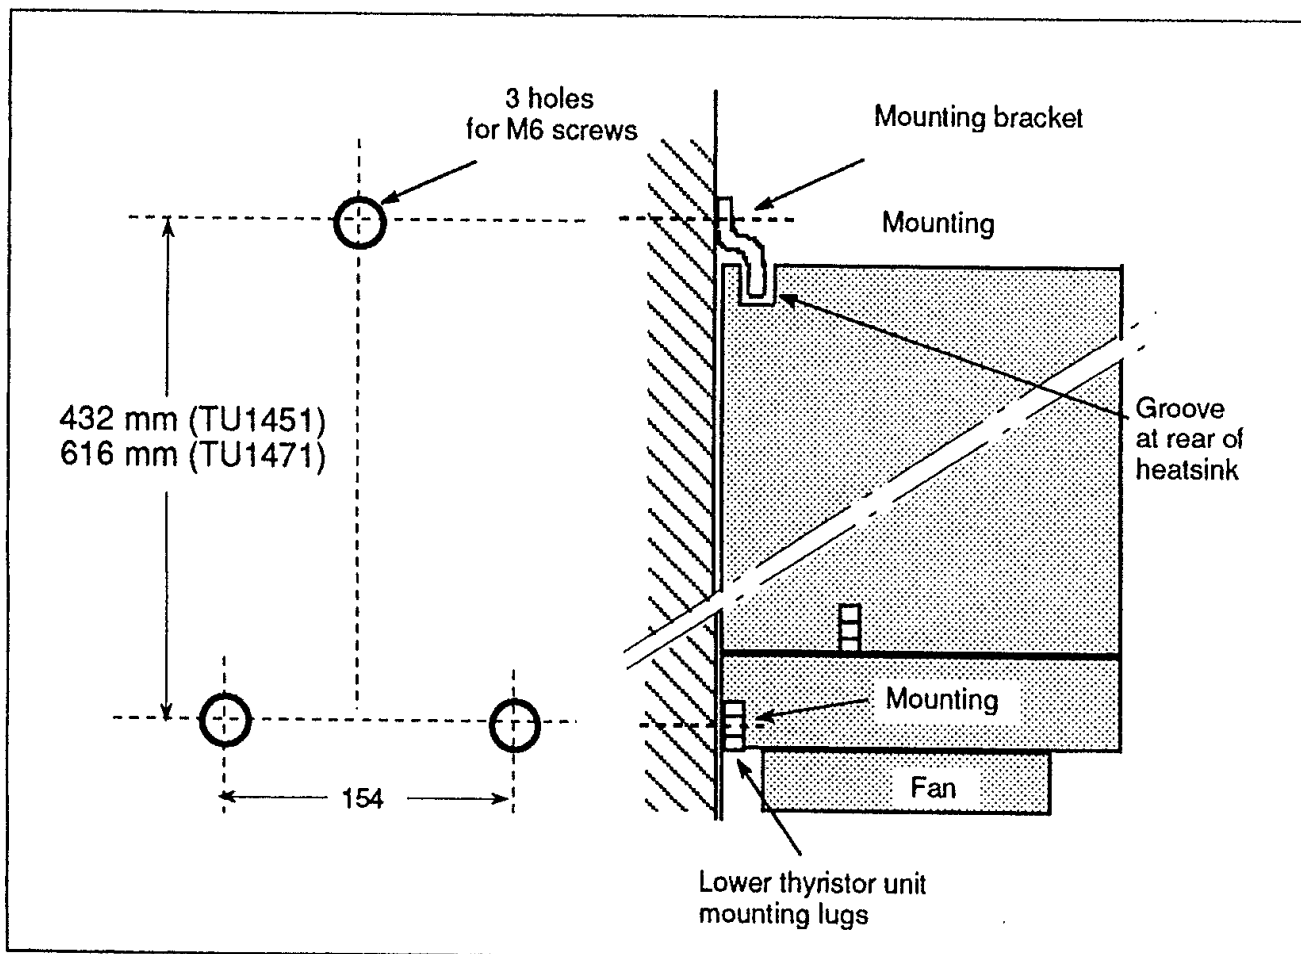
Thyristor unit drilling and mounting values (in mm). Bulkhead mounting
